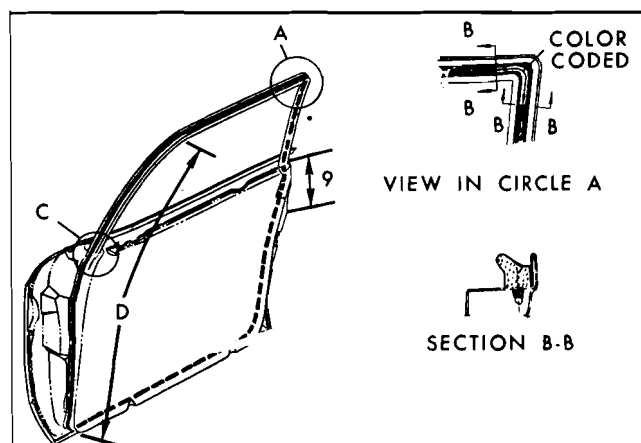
Door Weatherstrip - "B" Closed Styles
